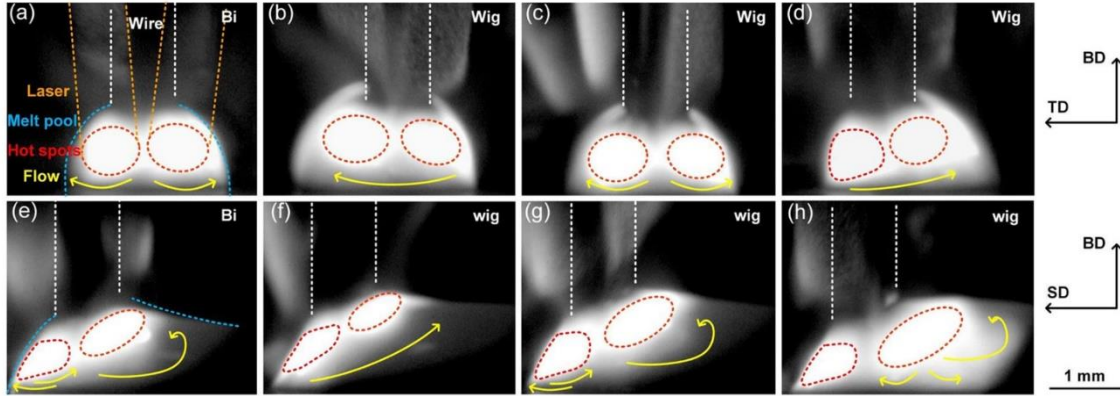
Melt pool dynamics observed by high-speed near-infrared imaging; (a) view of bidirectional printing in printing direction; (b)-(d) view of wiggle printing in printing direction; (e)-(h) view of bidirectional printing in the transverse direction; (f)-(h) view of wiggle printing in the transverse direction, showing three stages of melt pool oscillation [55].
